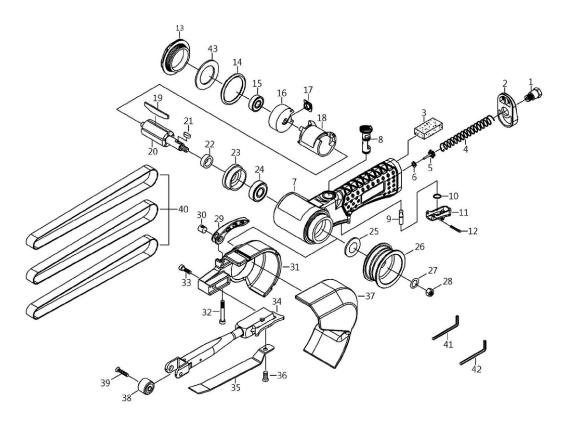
Spare parts drawing BS-C 20 PRO VS
